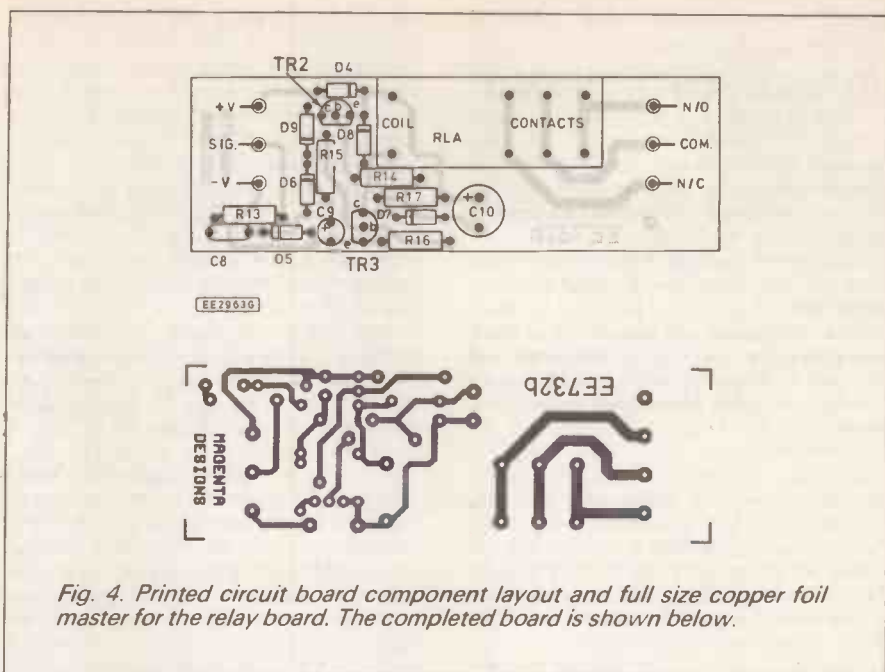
Printed circuit board component layout and full size copper foil master for the relay board. The completed board is shown below.
